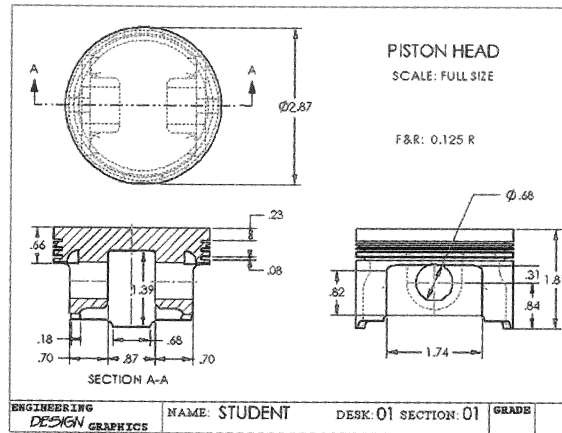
An Engineering Drawing of the Piston Head Projected Directly from the Solid Model
